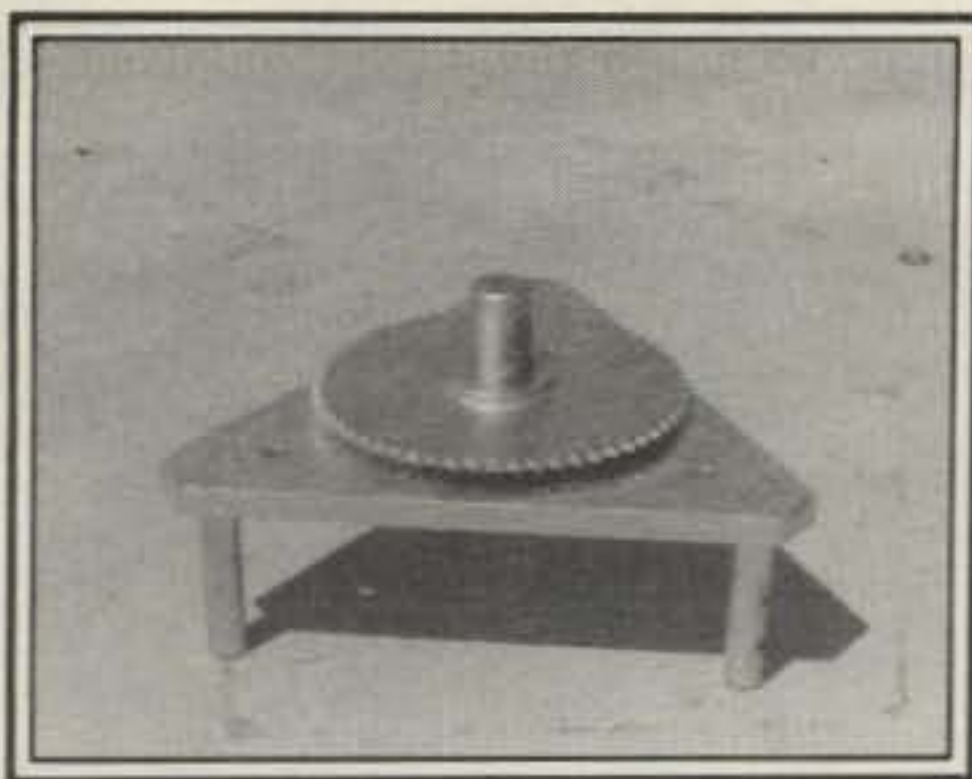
The large sprocket is shown installed on the base plate (here it is shown inverted) of the rotating tower.
